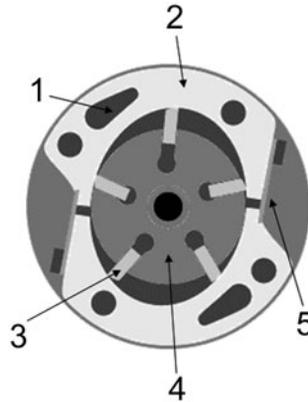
Blades compressor with elliptical internal chamber. Components: 1 manifold, 2 stator, 3 blade, 4 rotor, 5 exhaust valve.
